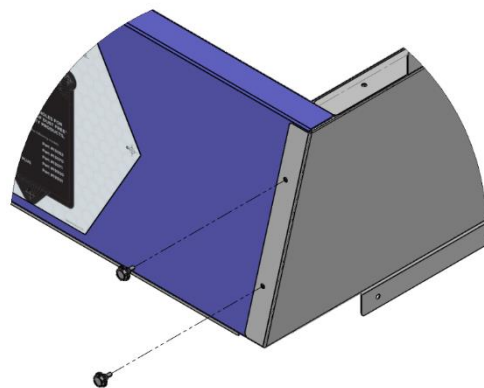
Secure rear panel to side panel with supplied No. 10 x 3/8" screws.
